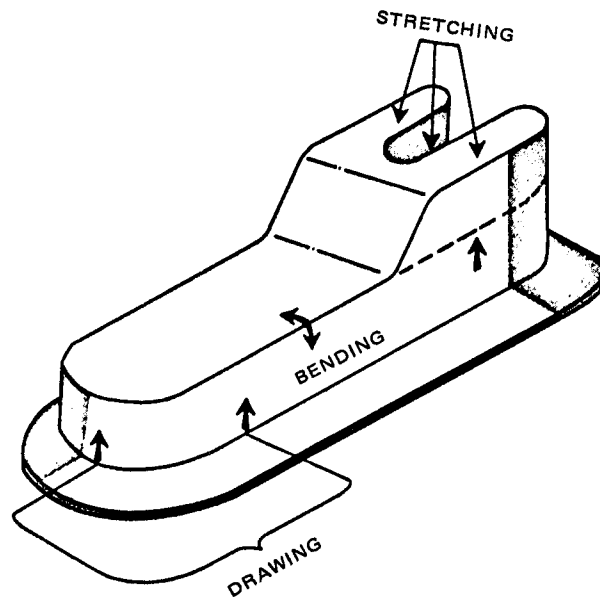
Complex shape with a combination of drawing, stretching and bending (6)
